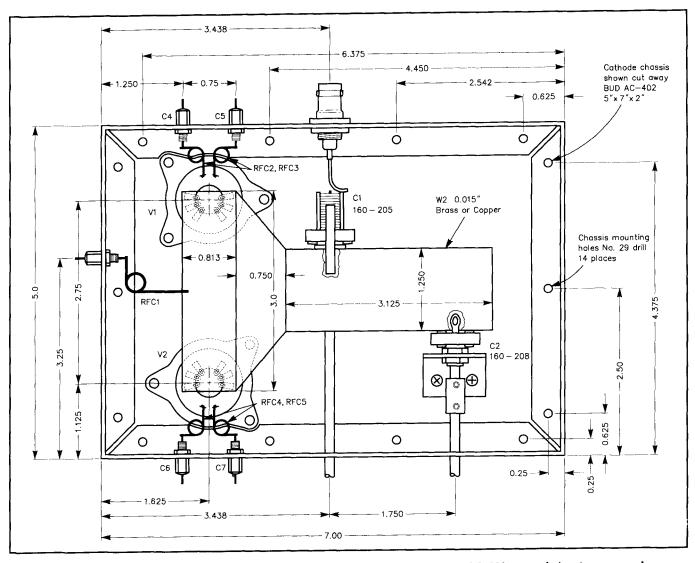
Cathode circuit layout. Enclosure is a $5 \times 7 \times 2$ -in. aluminum chassis (Bud AC-402 or equiv.) cut away as shown.
